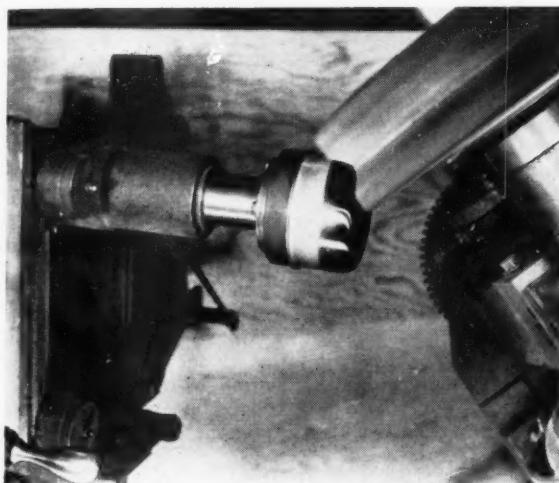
Deeply contoured to match the profile of the piece, the wheel is mounted on a polishing head and the stainless-steel sauce pan being polished is rotated on a fixture against the wheel. Observe that this wheel is simultaneously polishing the base, the 90-deg contoured area, and a generous portion of the side.
